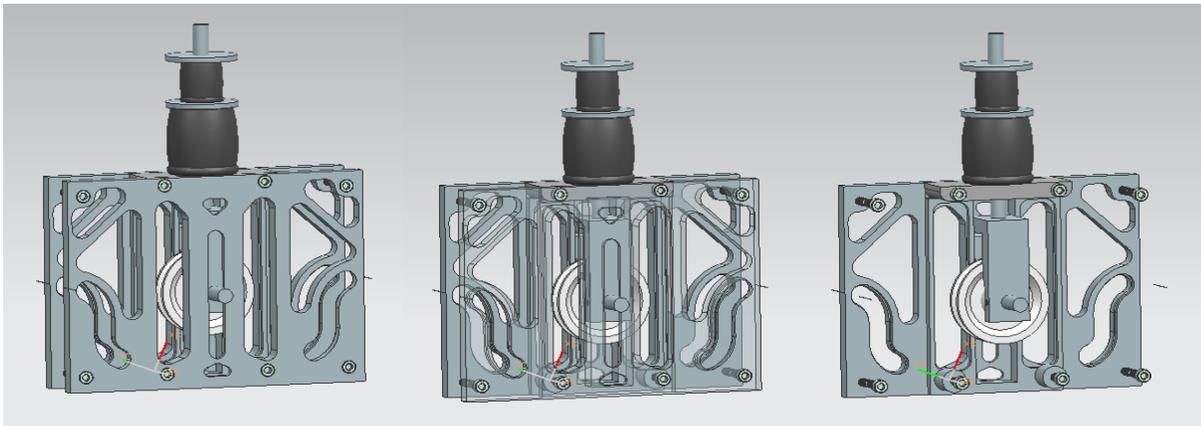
The final spring assembly CAD model. The picture on the left shows all components where the picture on the right has had the front pulley side plate removed so that you can see the inner workings of the spring assembly better.
